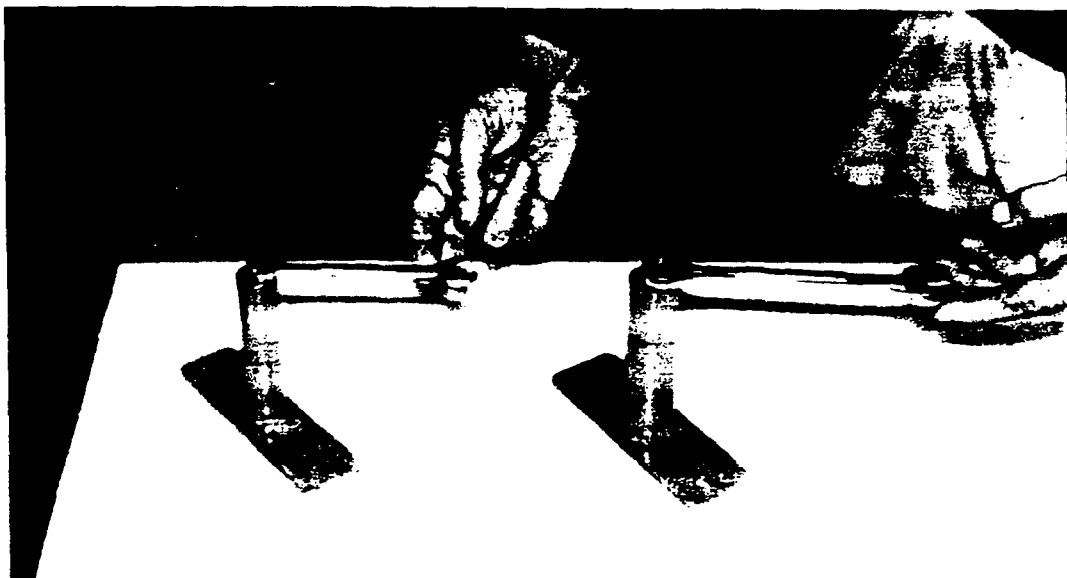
The 3/8" (left) and 9/16" (right) Bolt Heads with wrenches
